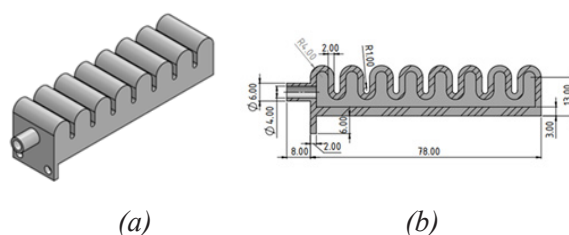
A pneumatic soft actuator: (a) General shape; (b) Geometrical parameters
